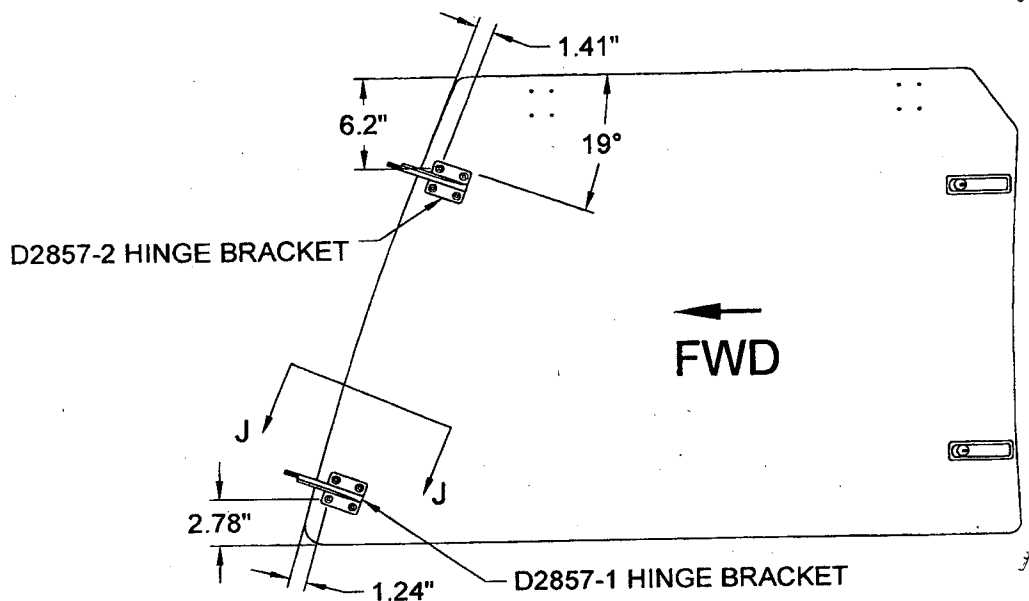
(a) – HINGE BRACKET POSITION ON LH D3186-1 SPACEPOD™ DOOR
